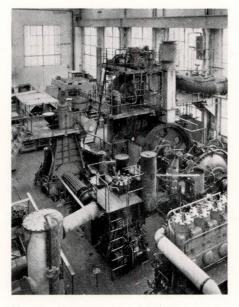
720 mm. bore 1,250 mm. stroke, single cylinder, 2-cycle, heavy fuel test installation
